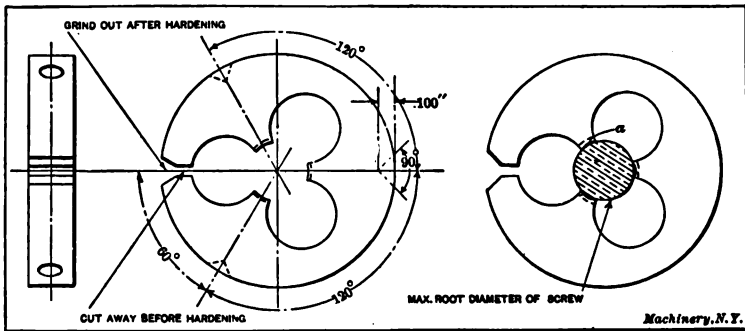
General Dimensions and Design of Approved Type of Adjustable Round Split Button Die
